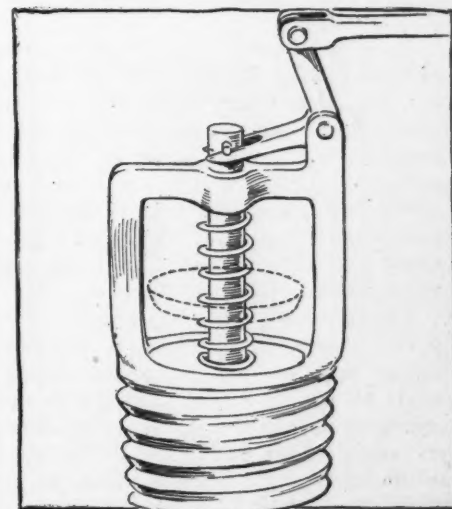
SEYMOUR'S EXTRA AIR VALVE
